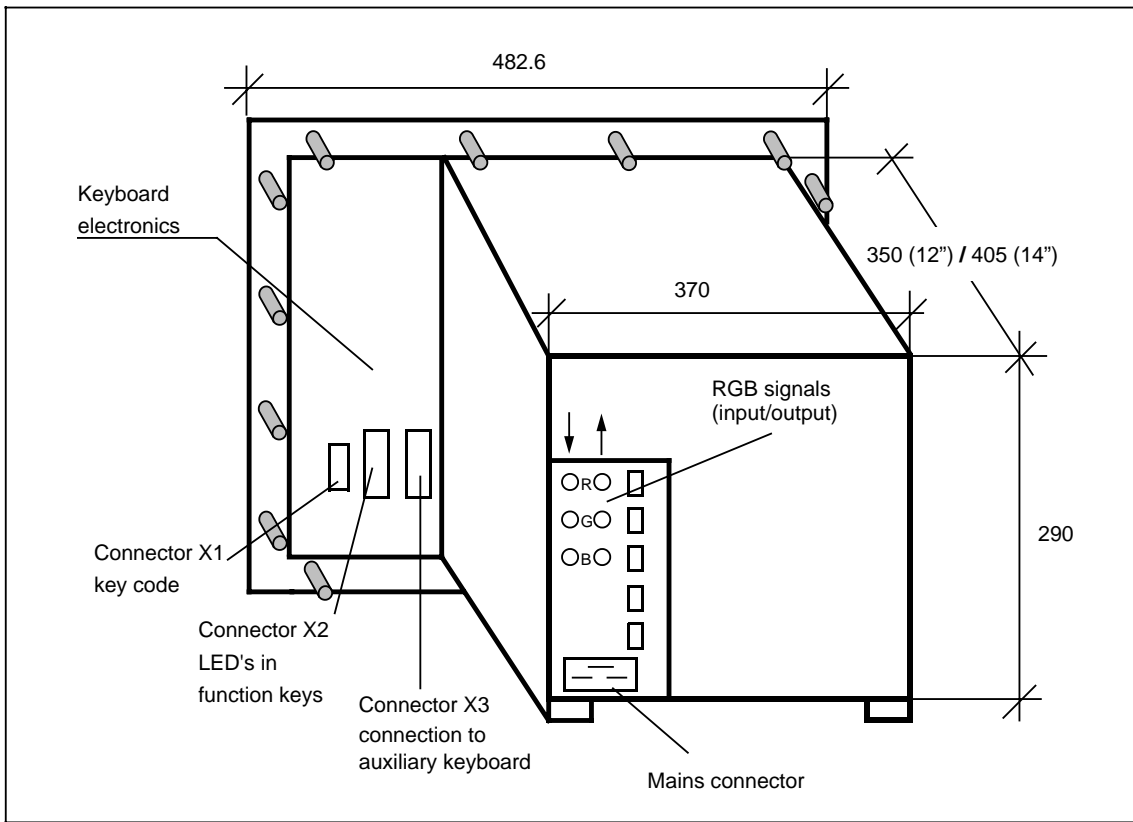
Rear view of compact operator panel with 12"/14" colour monitor
